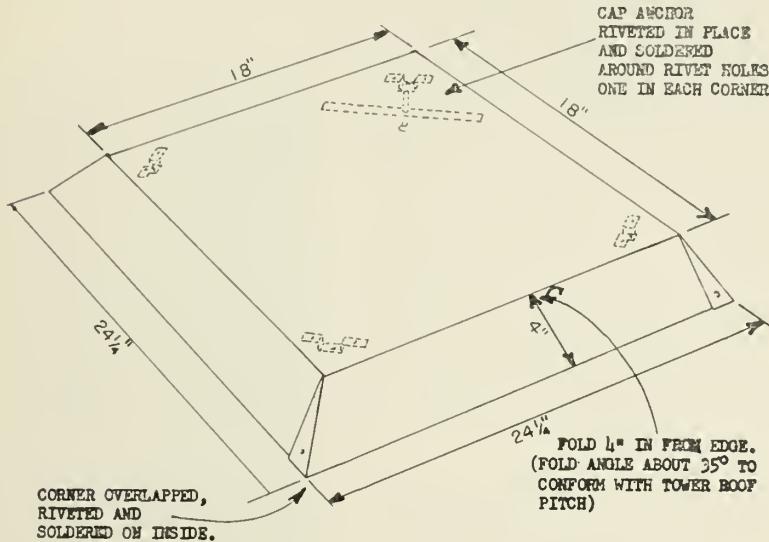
Schematic drawing of cap to cover access hole in roof of 7- by 7-foot tower cab.
